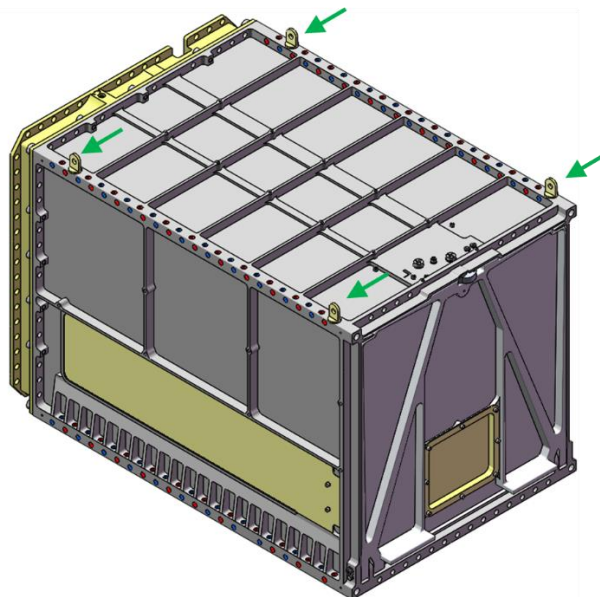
12U CSD with eyebolts threaded in to corner rails for lifting
